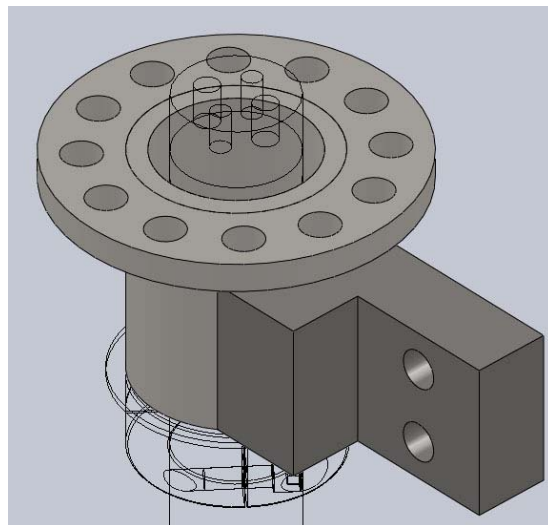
Lower Disc Welded to Upper Hub Assembly
